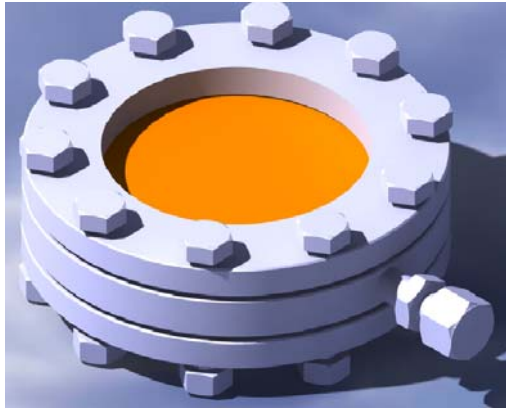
The modified flange type permeation sensor design using Metallic C-ring Spring Gasket
